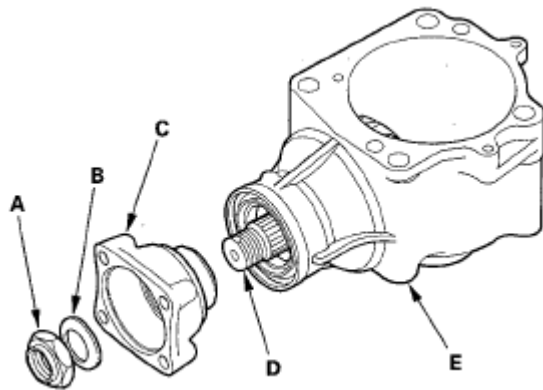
Identifying Locknut, Conical Spring Washer, Companion Flange And Transfer Output Shaft
